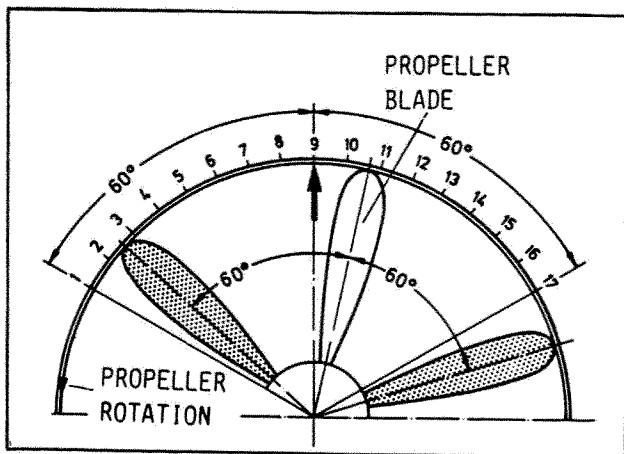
Phase-Shift Adjustment between Crank Shaft and Propeller
